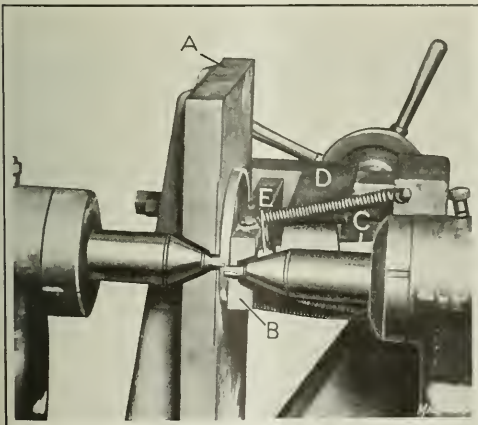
Duplex Hand Milling Machine with Piston-ring Clamping Device
